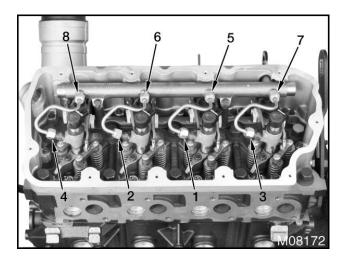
Fuel rail to injector tube assemblies tightening sequence (typical)
